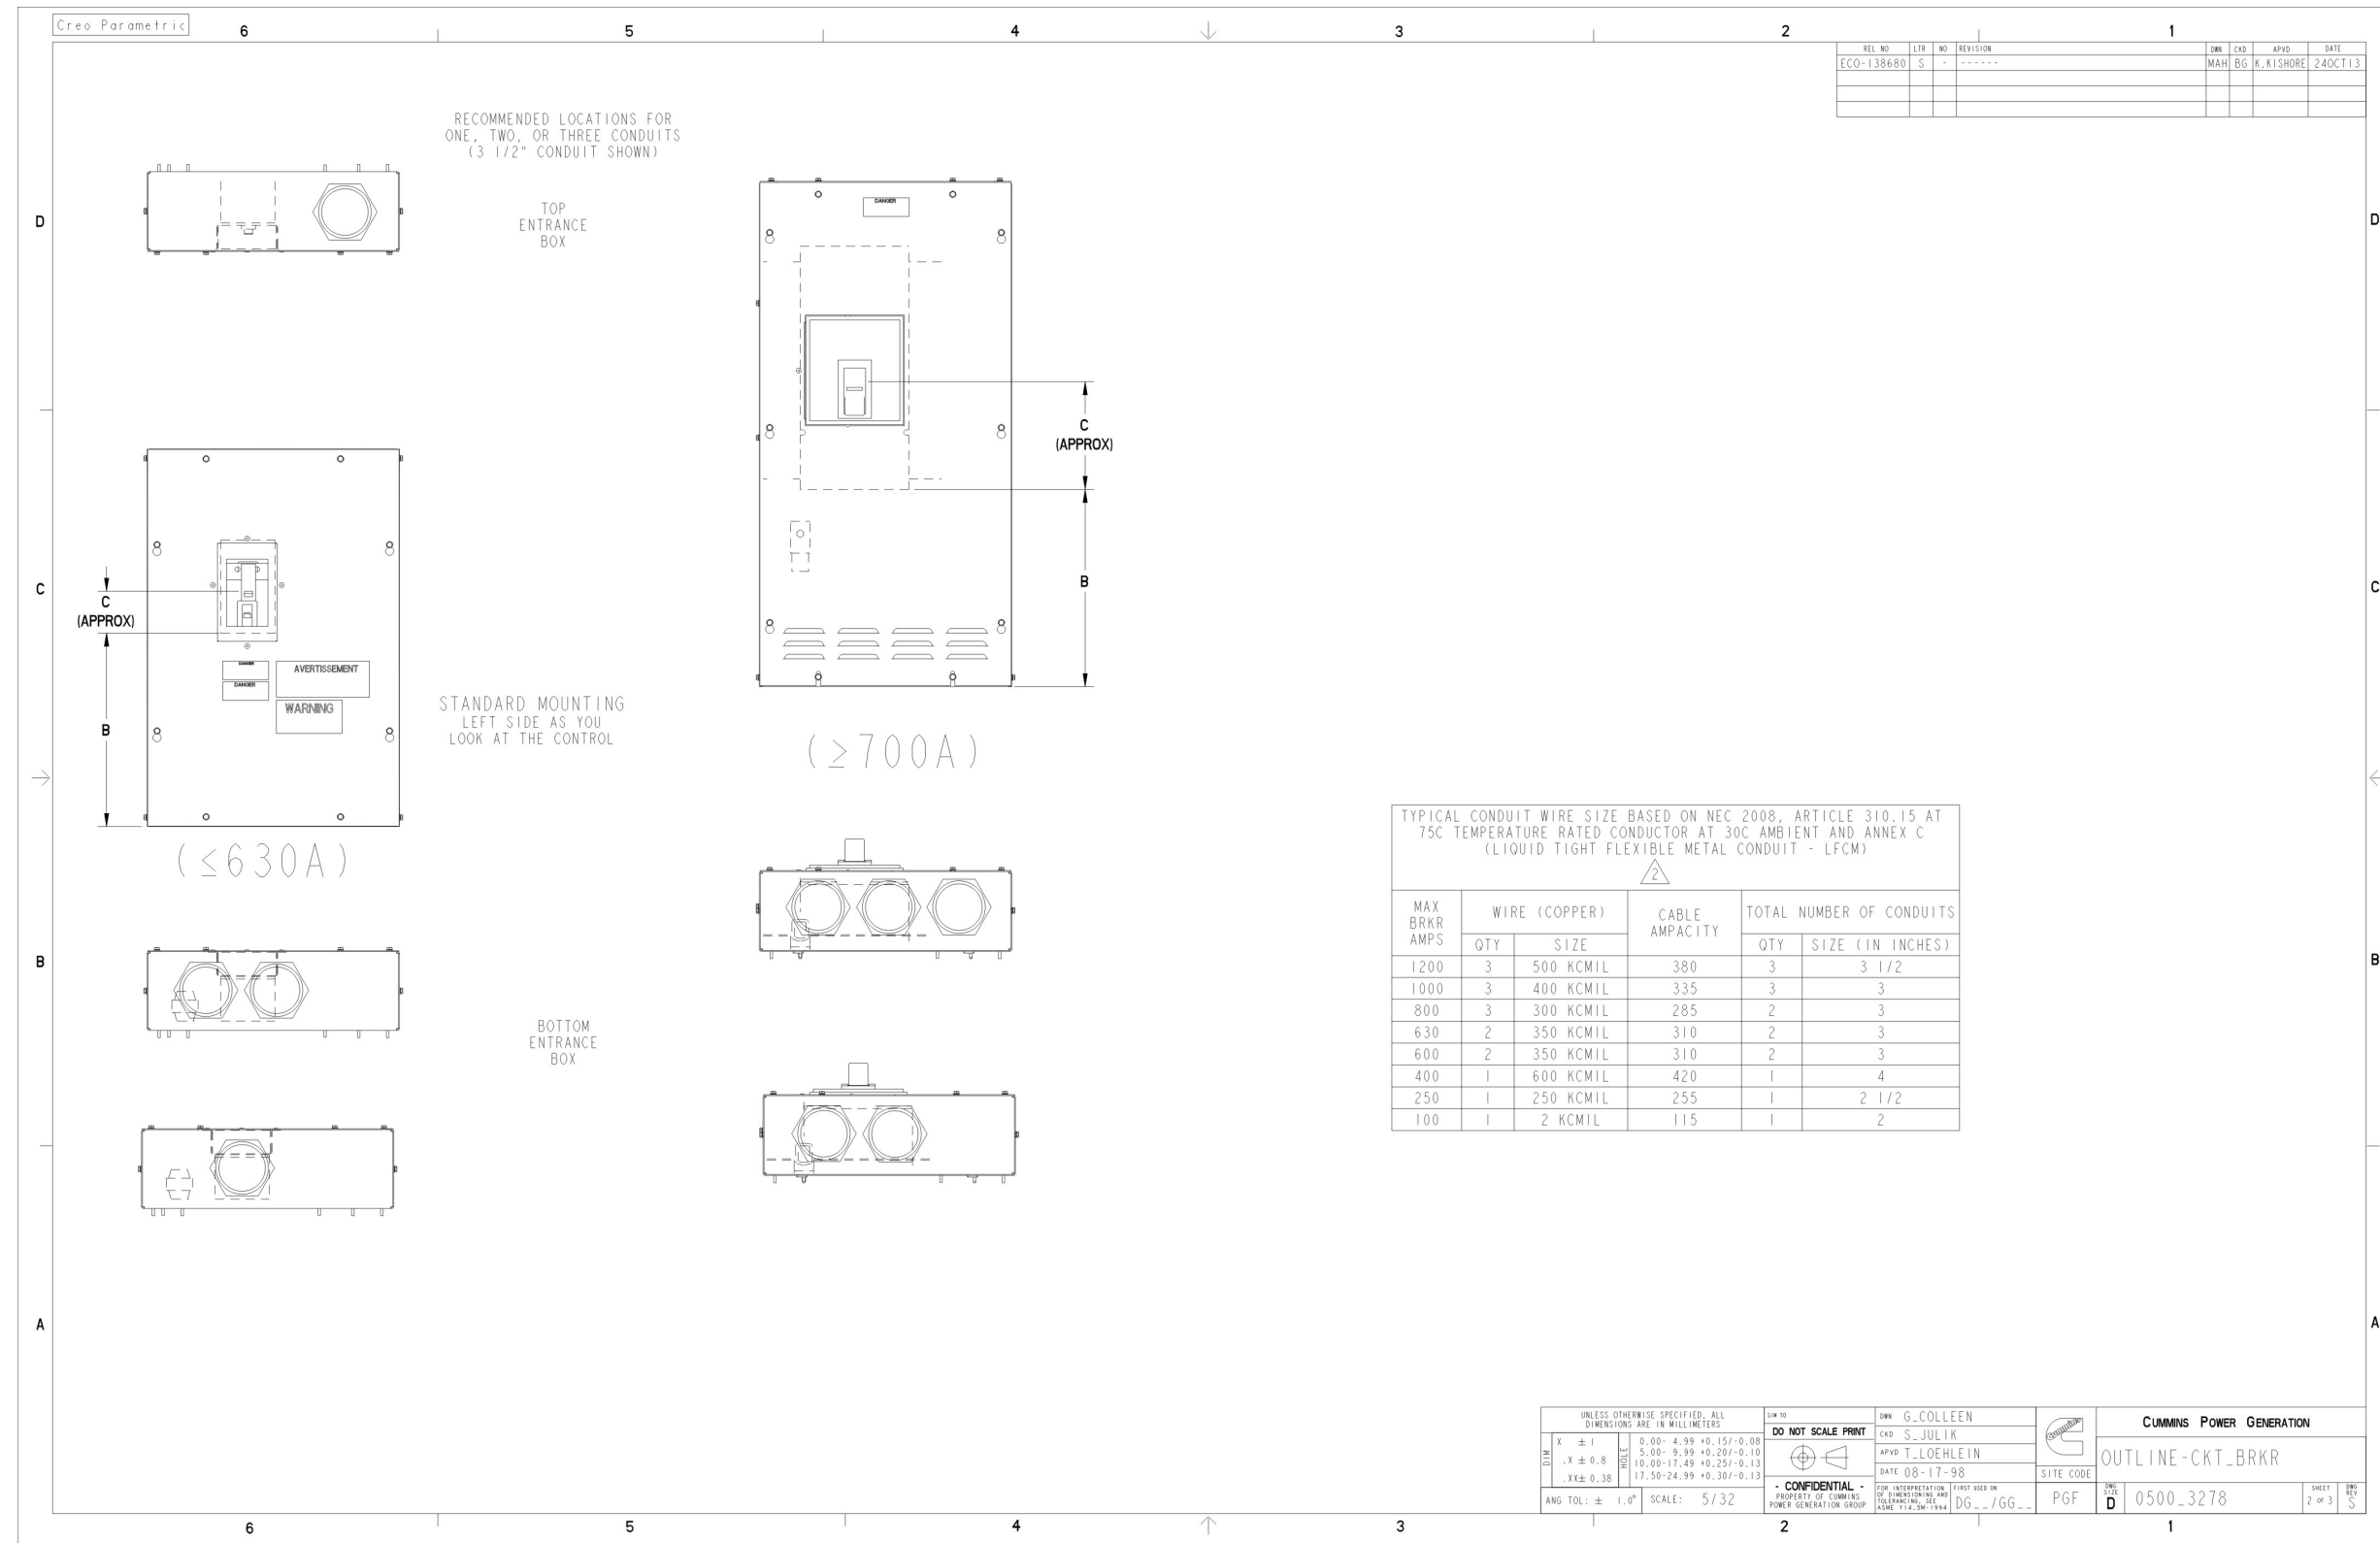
OUTLINE CIRCUIT BREAKER (0500-3278 SHEET 2)
